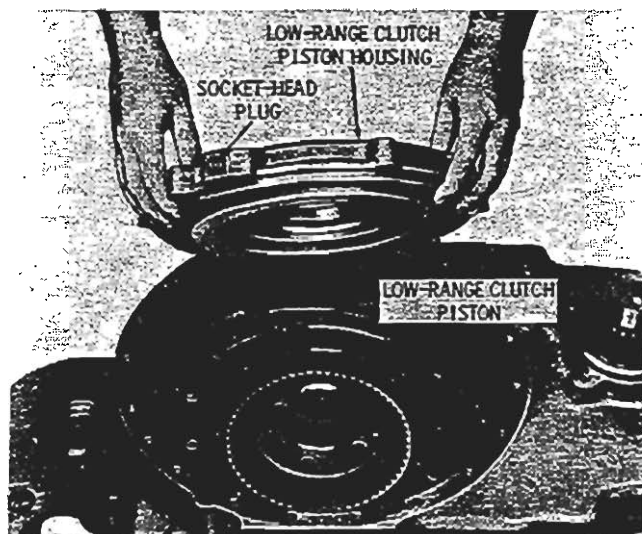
REMOVING LOW-RANGE CLUTCH PISTON HOUSING BOLTS
